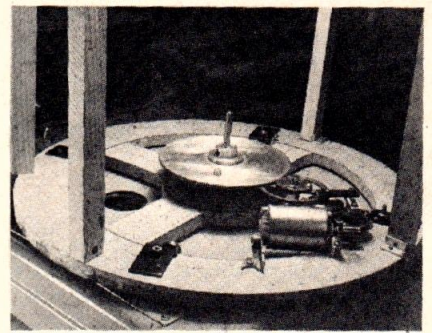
ROBOT BODY supporting structure is of wooden construction. Note pivot-post mounting flange and ball-bearing wheels beneath the bottom bulkhead.
